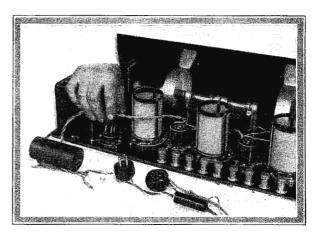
This photograph shows the Carter adapter harness placed in a storage battery operated receiver for conversion to alternating current
